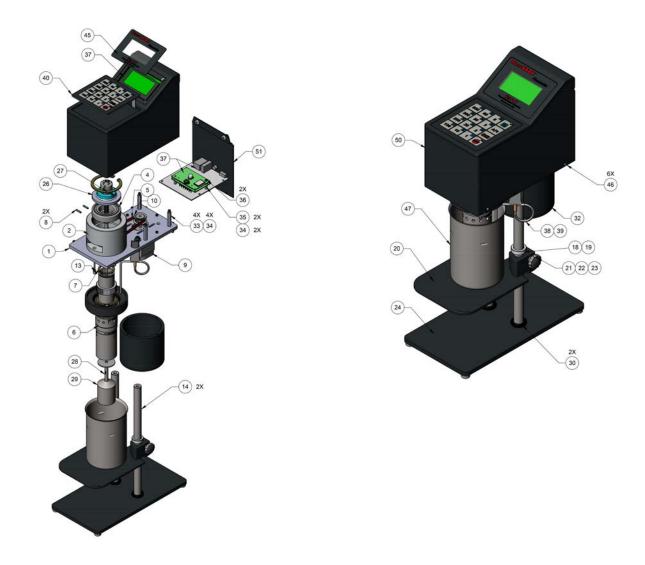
RheoVADR® Rheometer Assembly, View 1
